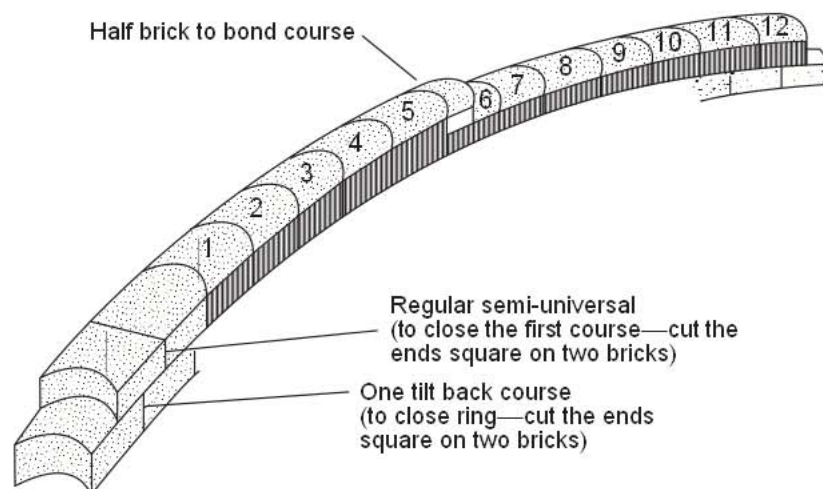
Semi-universal brick construction for ladle side-walls.
